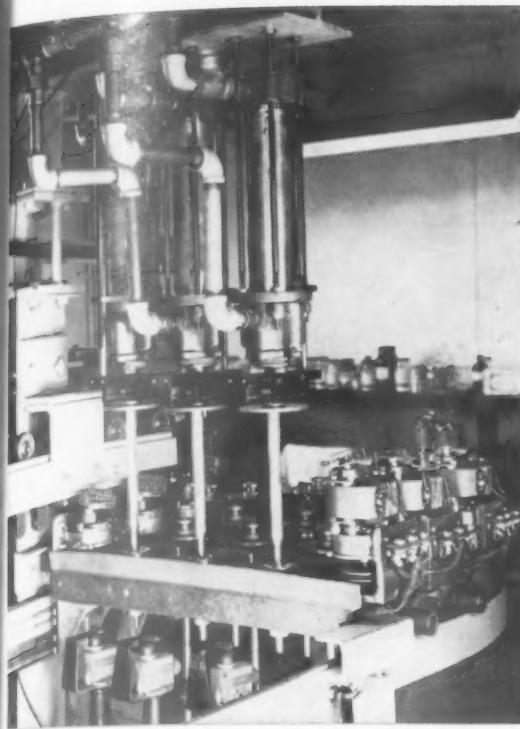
Here is the stripping station for removing electroformed fountain pen caps from the machine shown in Fig. 2.
